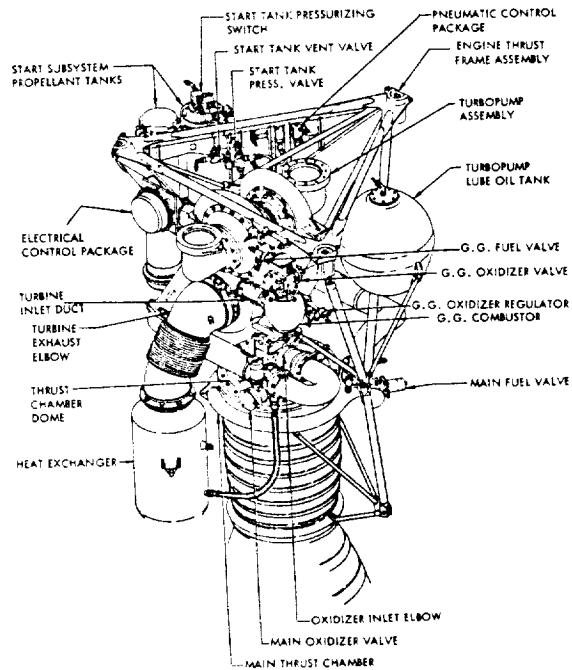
System packaging design detail of the engine shown in figure 10-10.
